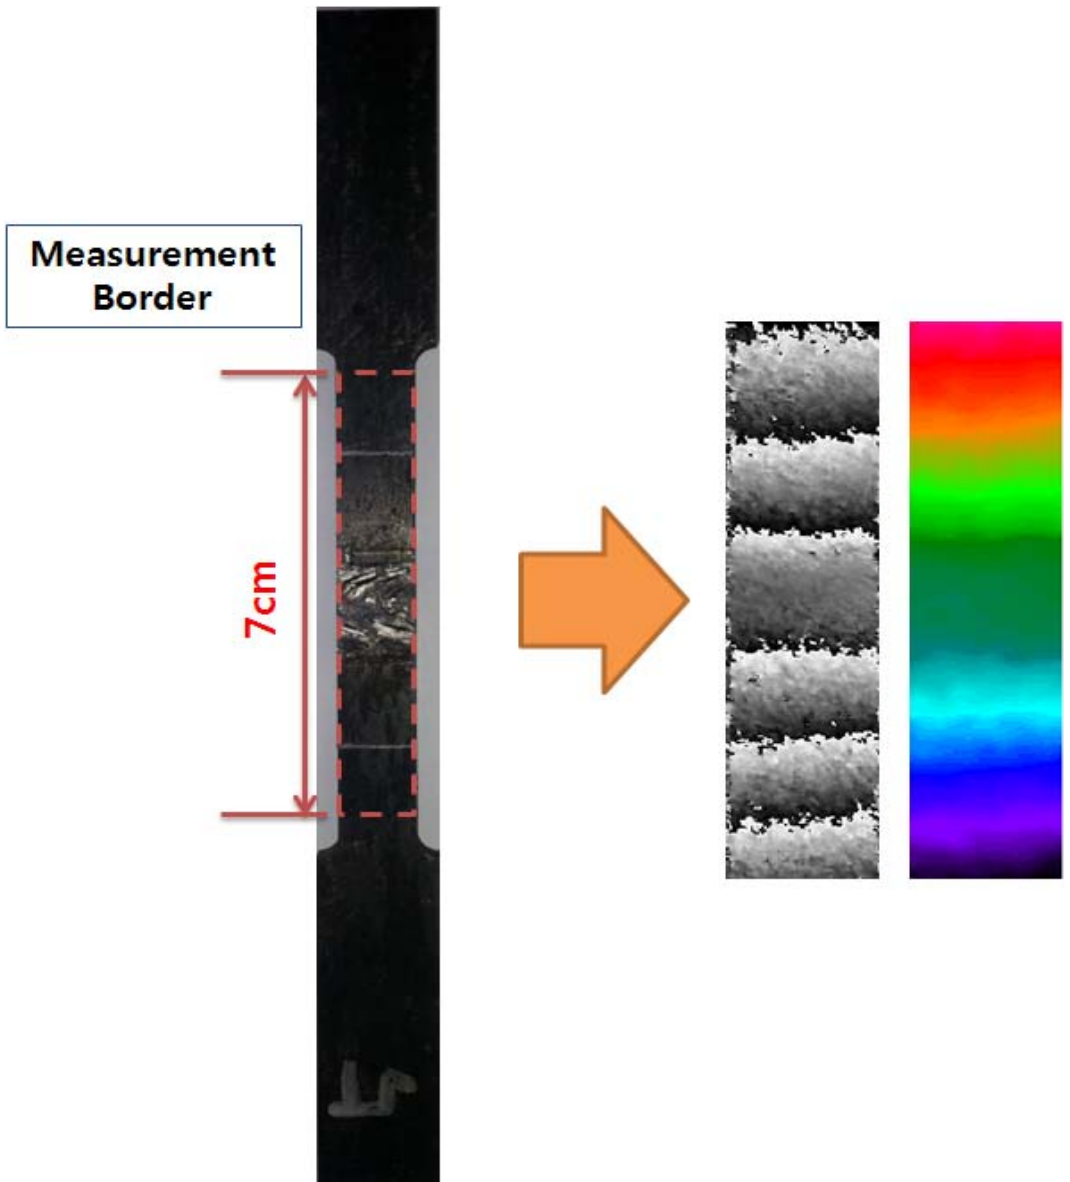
Measurement area of structural steel welded specimen
